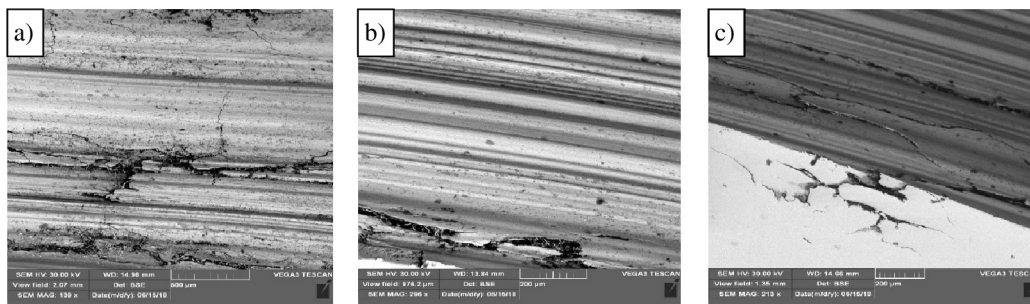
Analysis of selected areas in zone II for a tool which has produced 900 forgings
